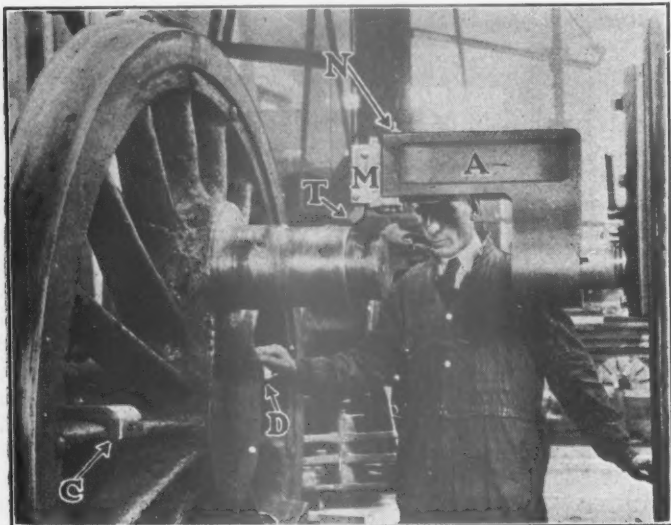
Close-up View Showing Tool-holder and Adjusting Clamps
